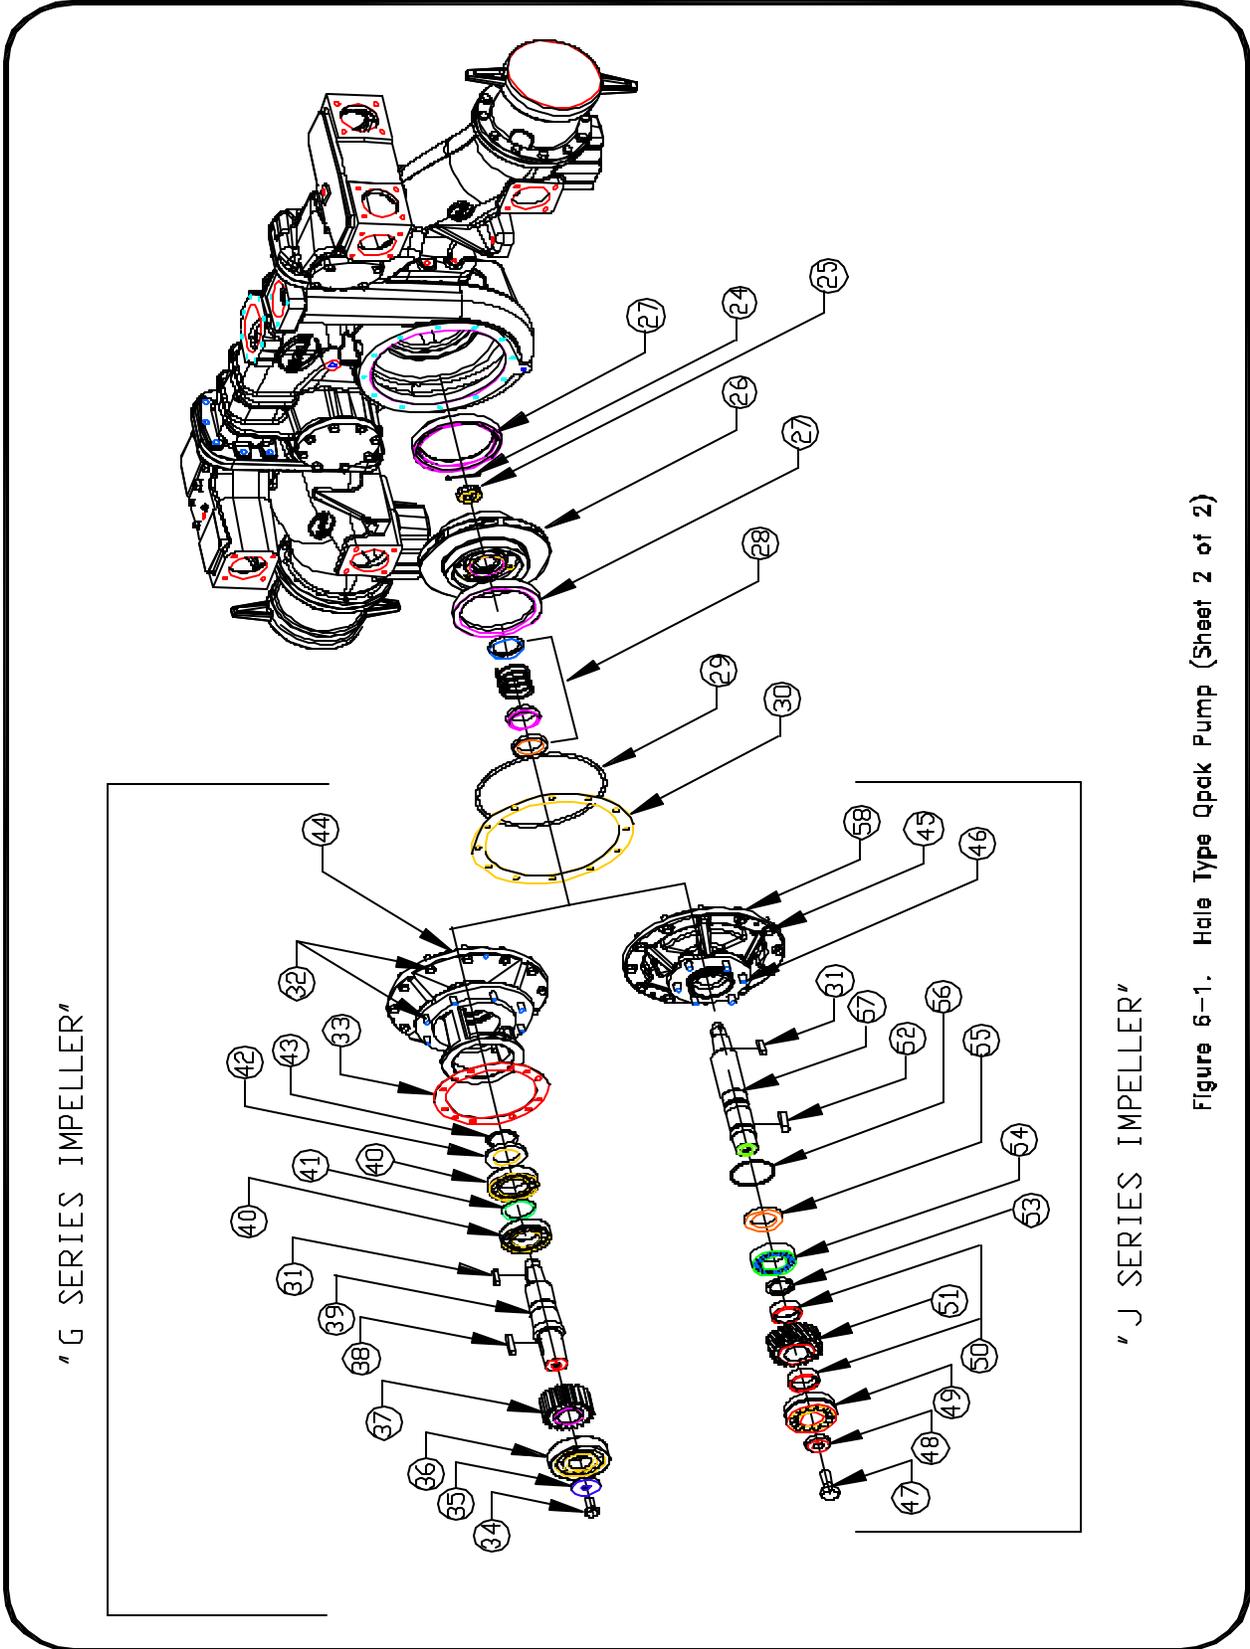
Hale Type Qpak Pump (Sheet 2 of 2)
